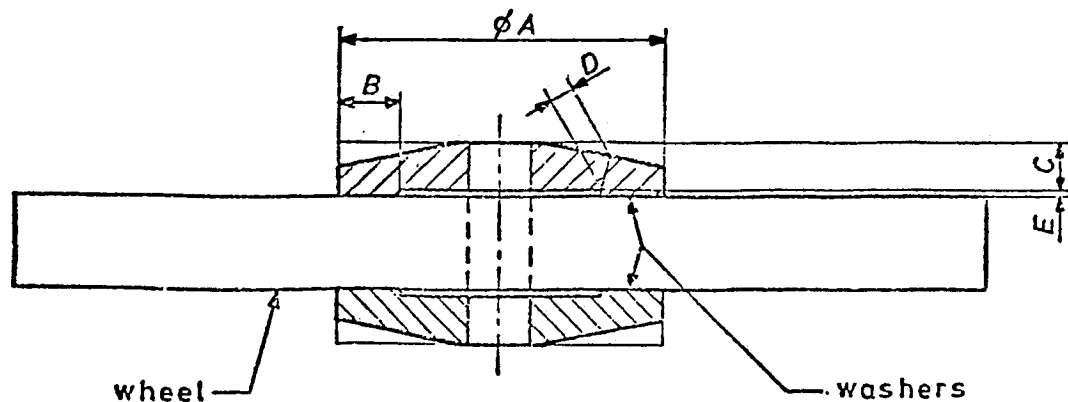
Flanges for straight-sided wheels (excluding reinforced cutting-off wheels) and unthreaded-hole cup wheels (for dimensions see table 2)
